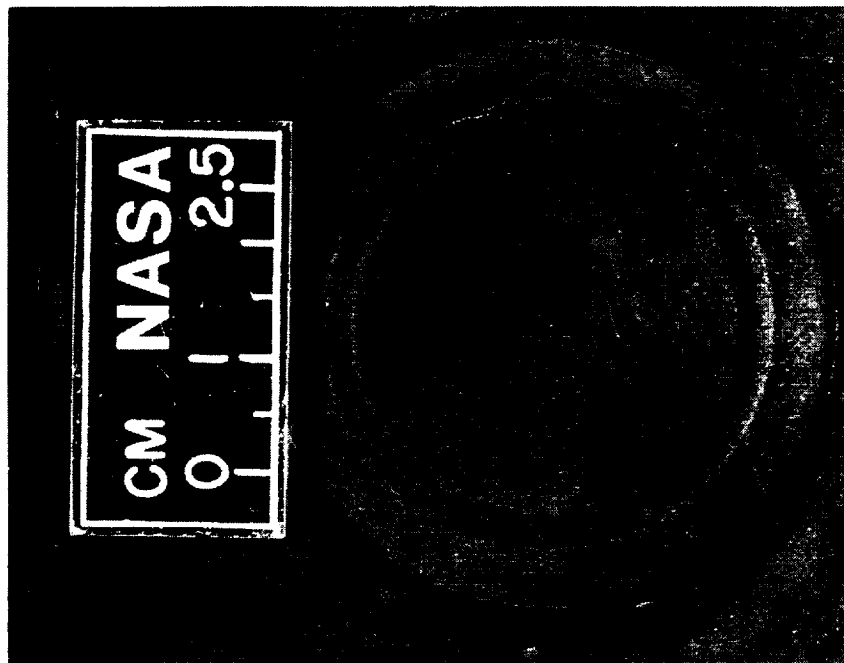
Strain-age Cracking in a Welded and
